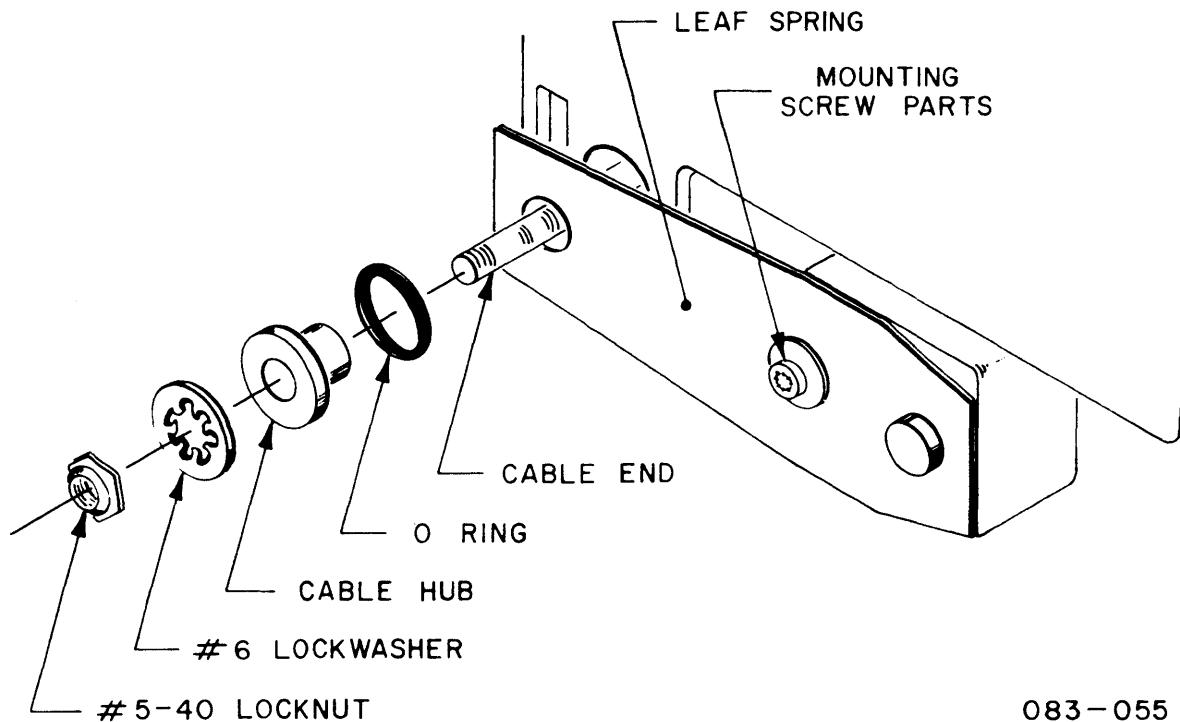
Carriage Drive Cable Tension Spring Assembly
